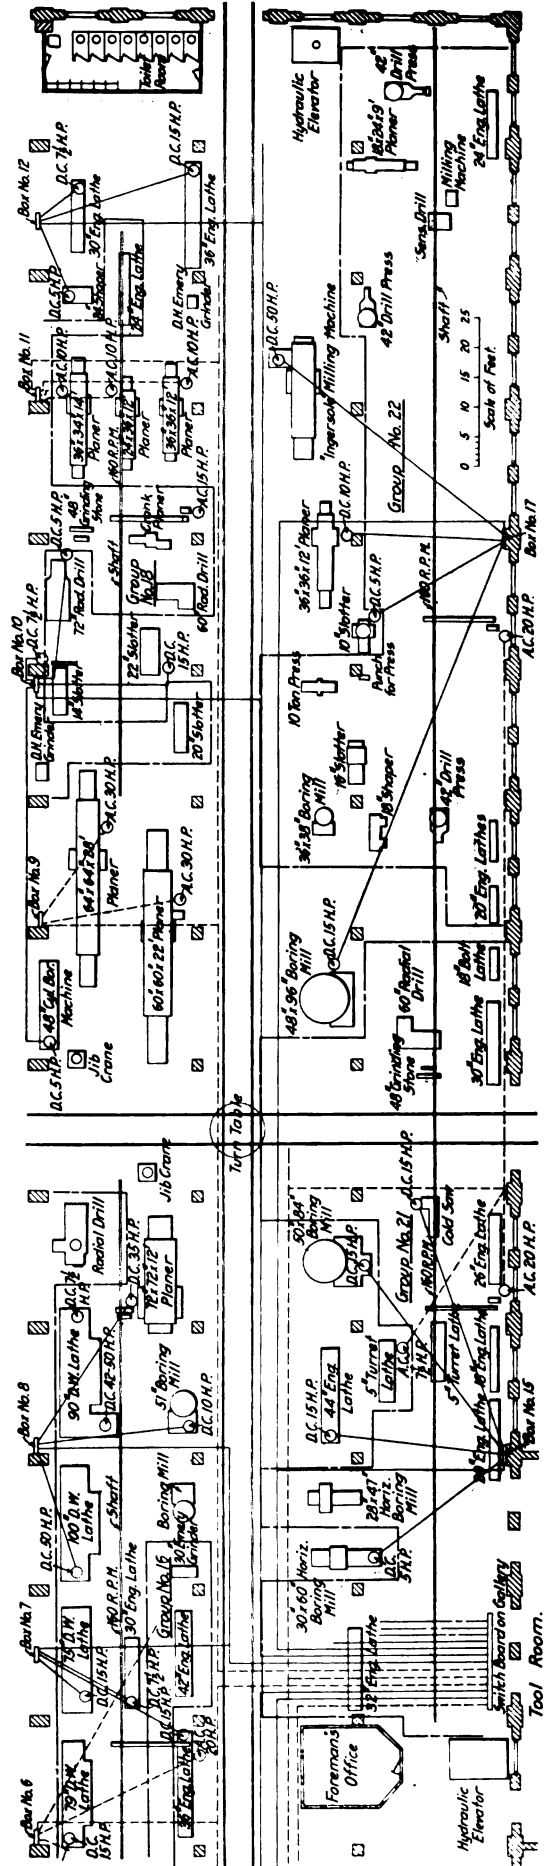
North End of Machine Shop Showing Arrangement of Machine Tools, Motors and Wiring; Burnside Shops of the Illinois Central.
